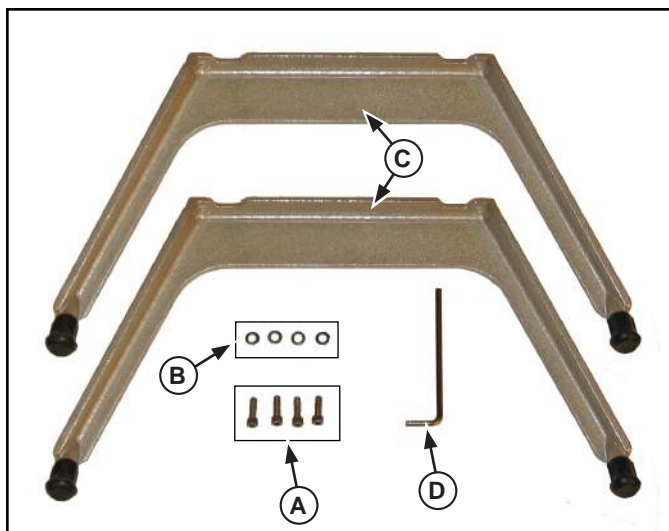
Legs, Hardware and Tool for the Lettuce King I.
